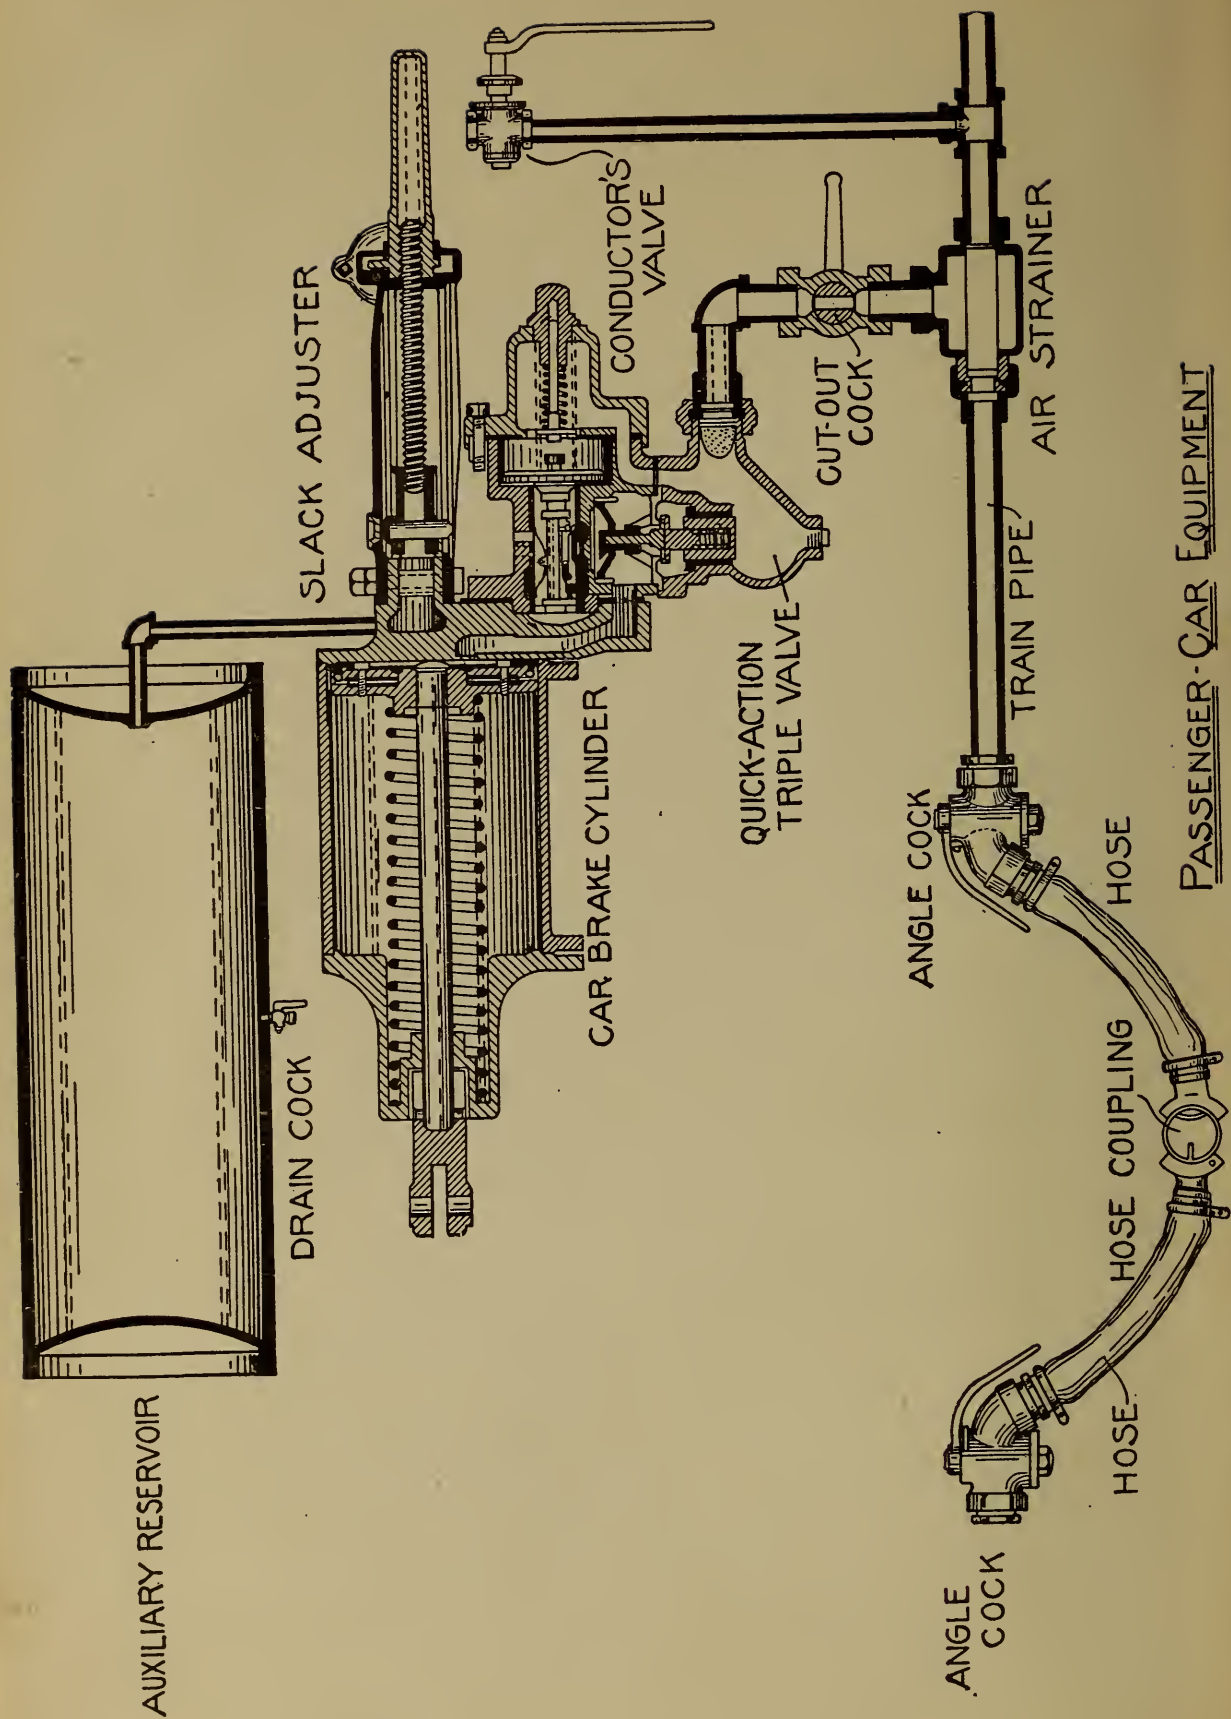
Passenger-Car Equipment, Westinghouse Air-Brake System.
